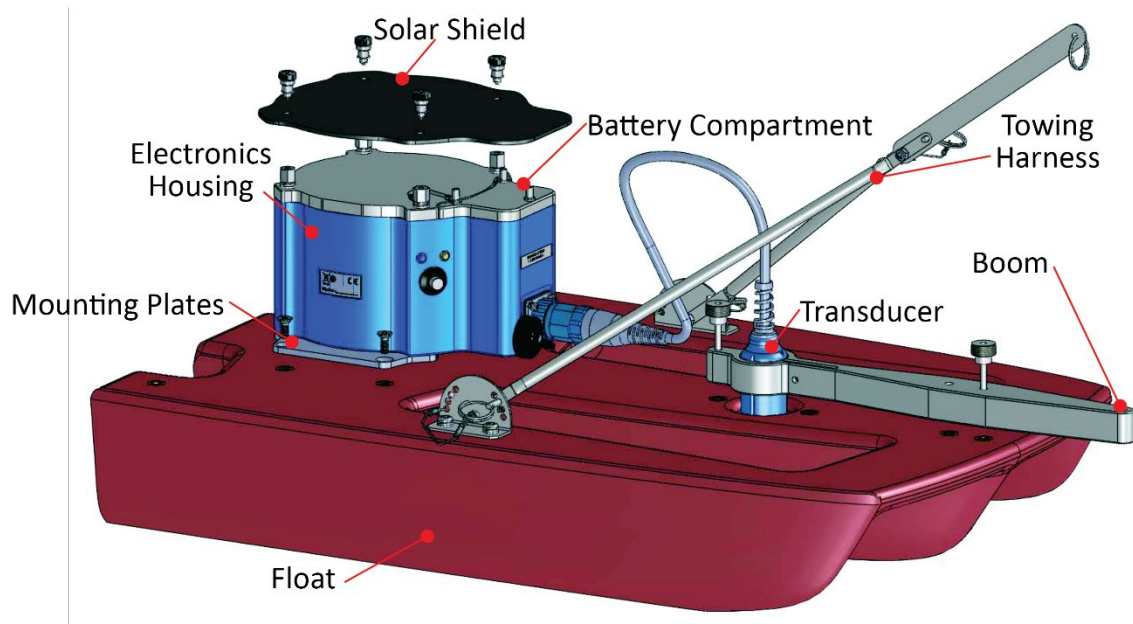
StreamPro ADCP Assembly – Boom in in-hull Position
